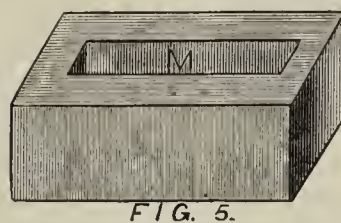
represents a handy block tool to use in forming the edge X, by inserting the flange in the hole M. This tool is easily made by taking two pieces of iron, of the proper size, as per L L, Fig. 6, and welding on steel at O O, the upper surface next to the two pieces being of sufficient size to give the proper sized hole at M, in Fig. 5; and then weld in at N N. A little dressing with the file will then complete the tool.
